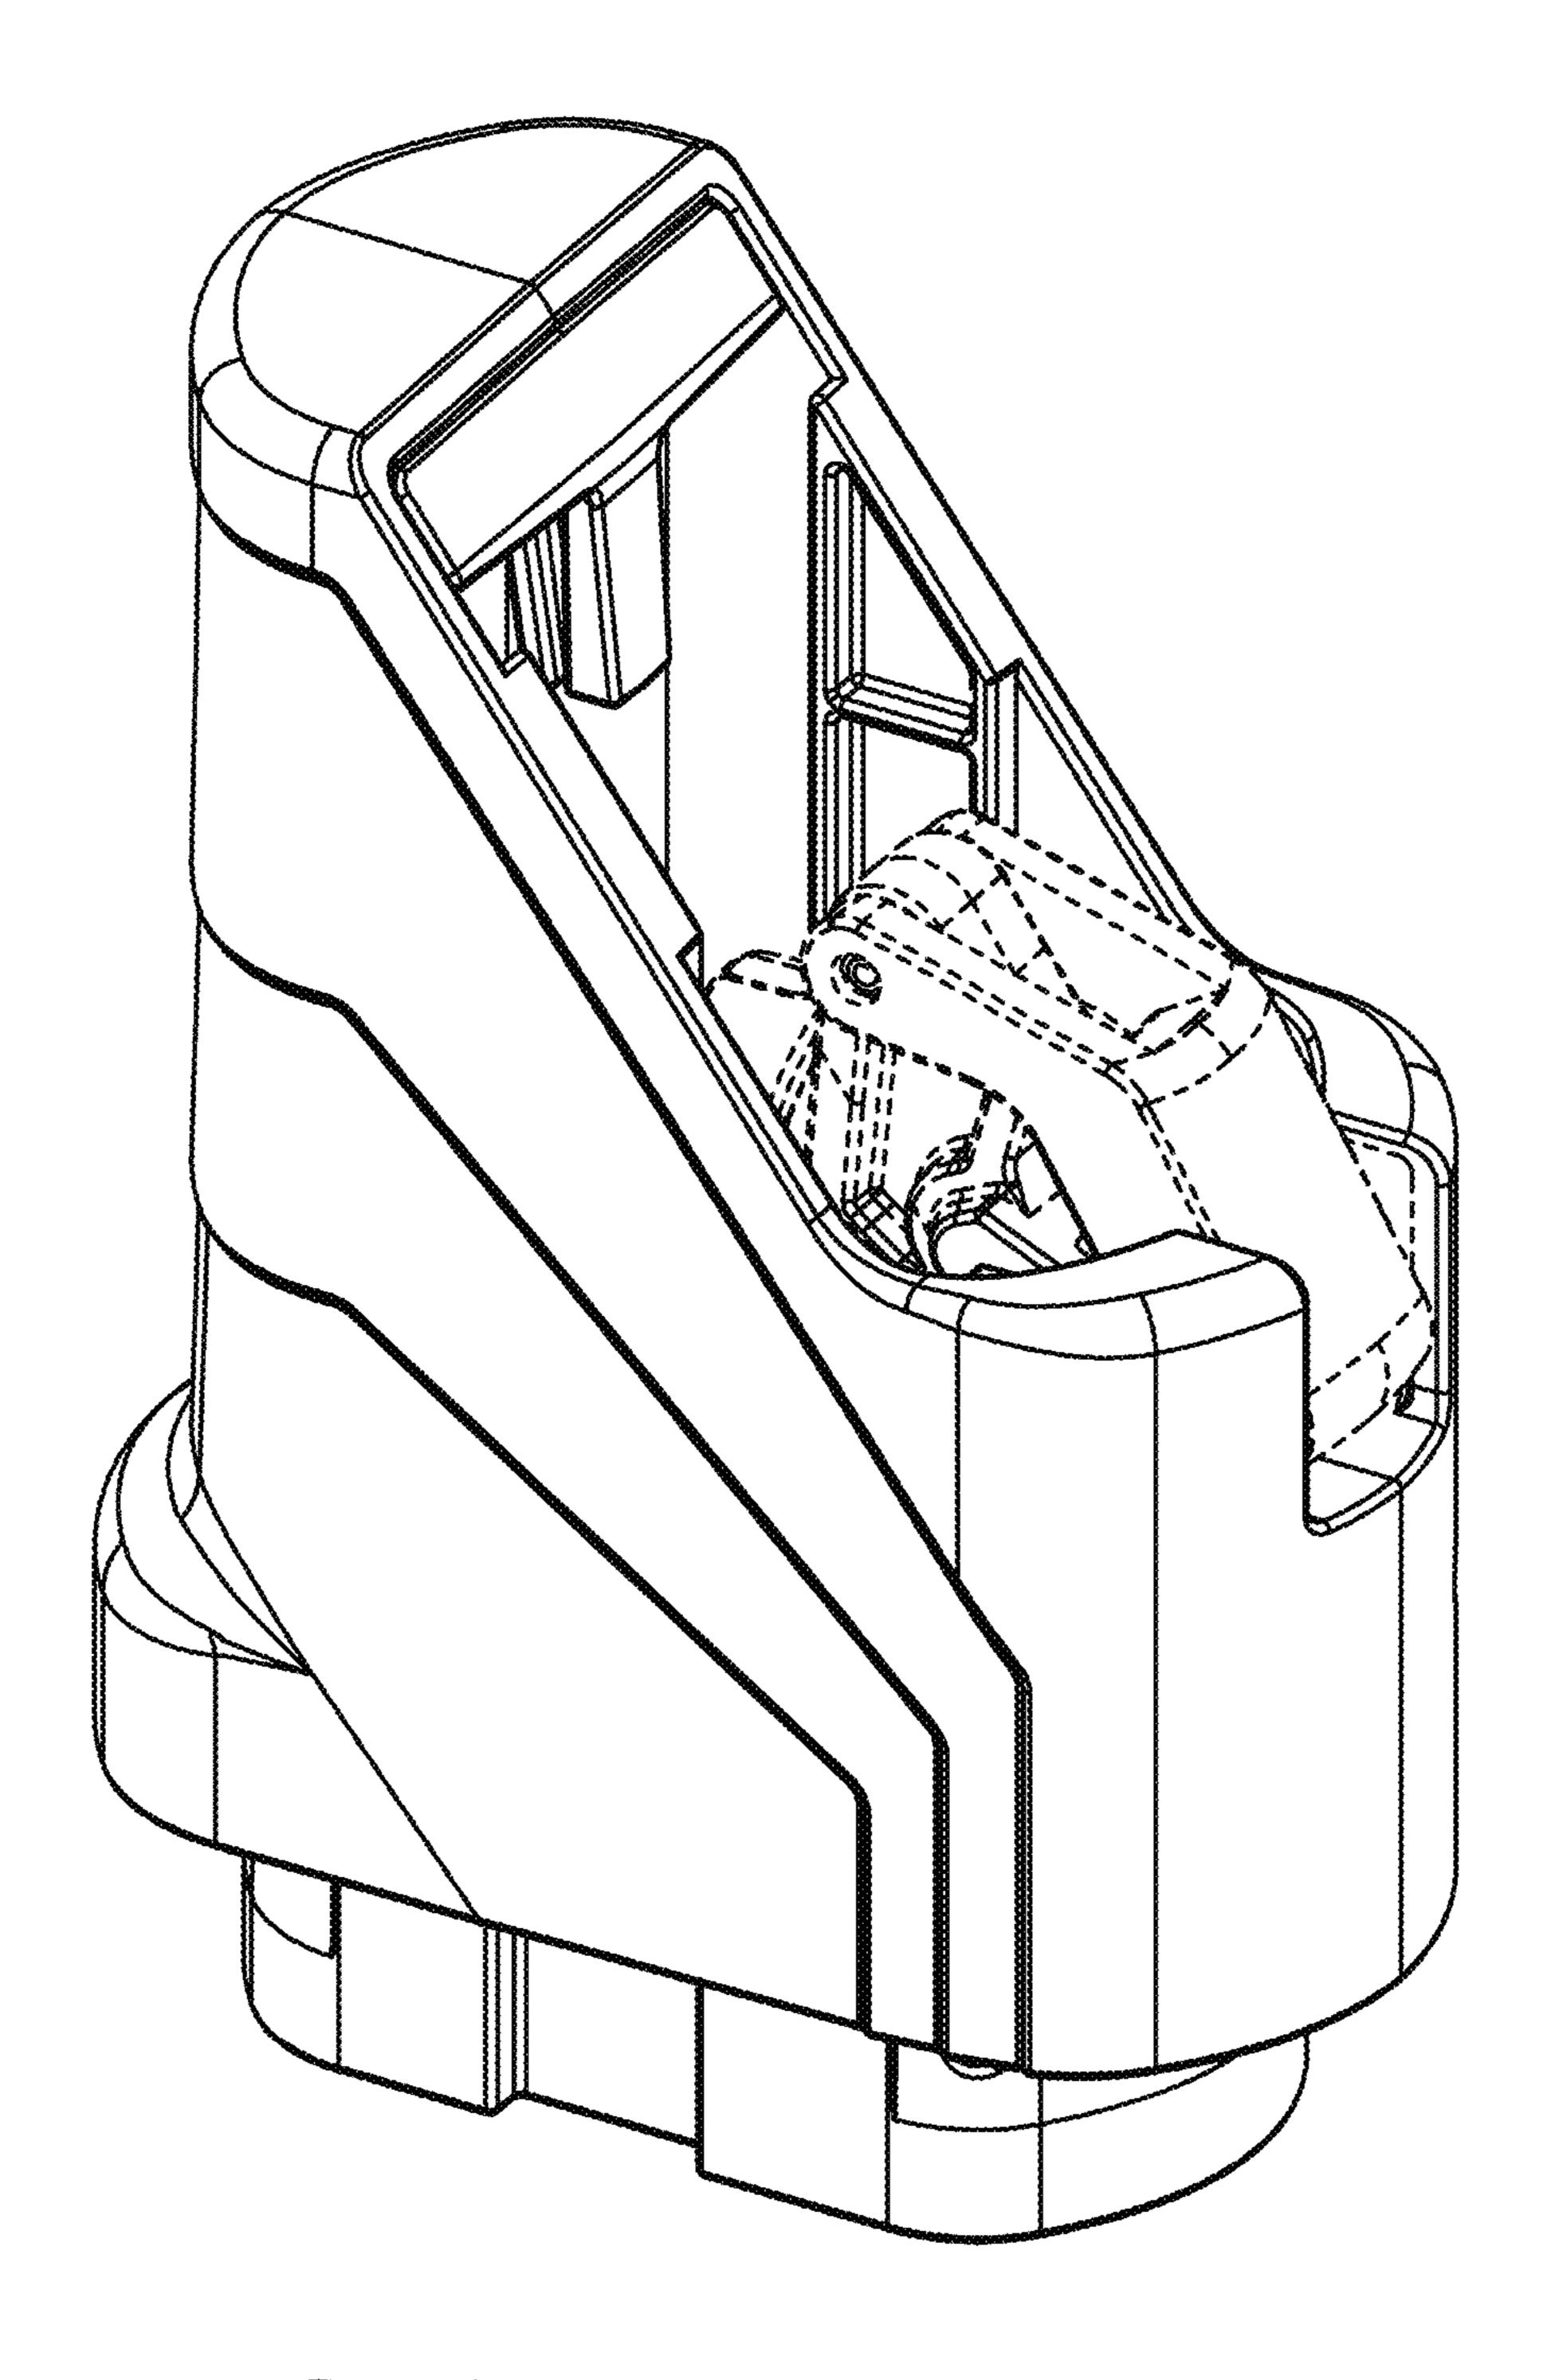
is a rear, left side, top perspective view thereof. The bottom of the kinetic magazine loader is not shown in the drawing and forms no part of the claimed design. Broken lines shown in the drawings illustrate structure or
